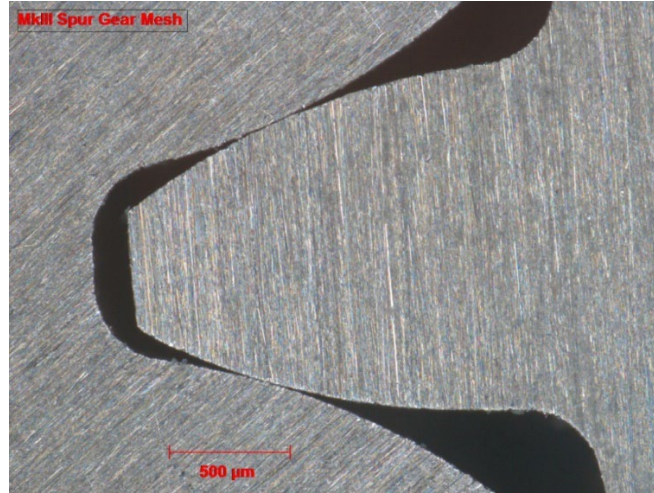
Microscope imaging of a pocket formed during meshing of two involute gears
